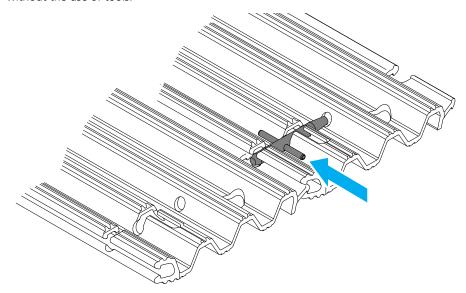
Drive Selloc Pin so it is centrally positioned within the Locking Bolt
